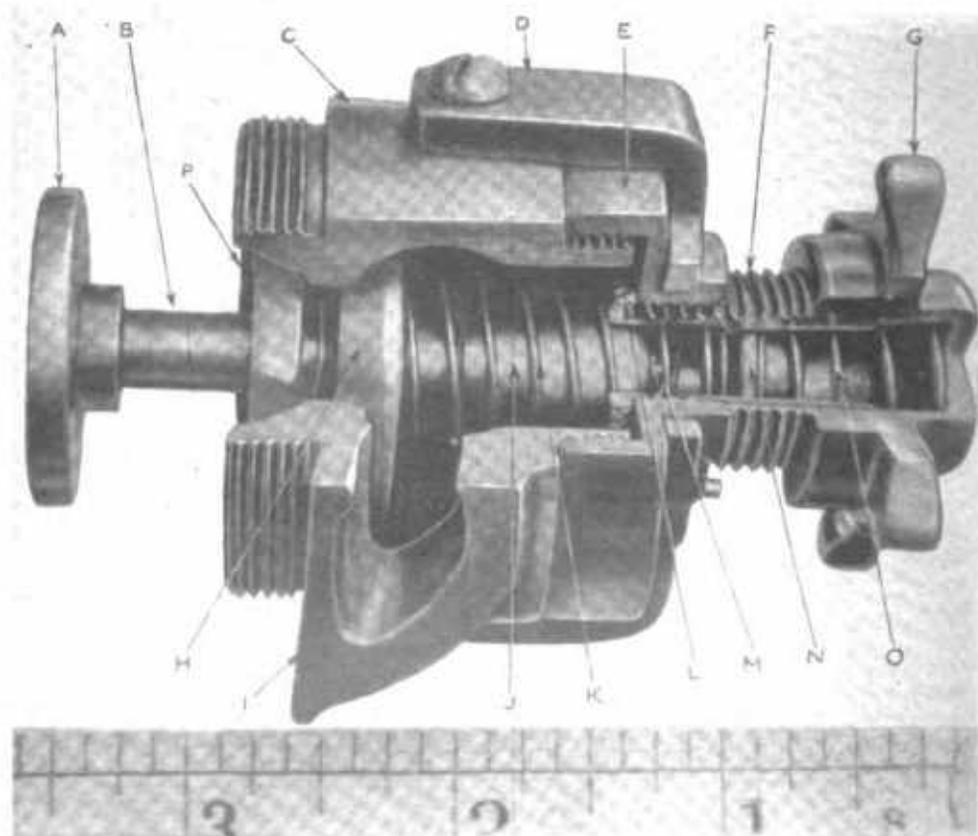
Helmet, air-regulating escape valve, assembled.
